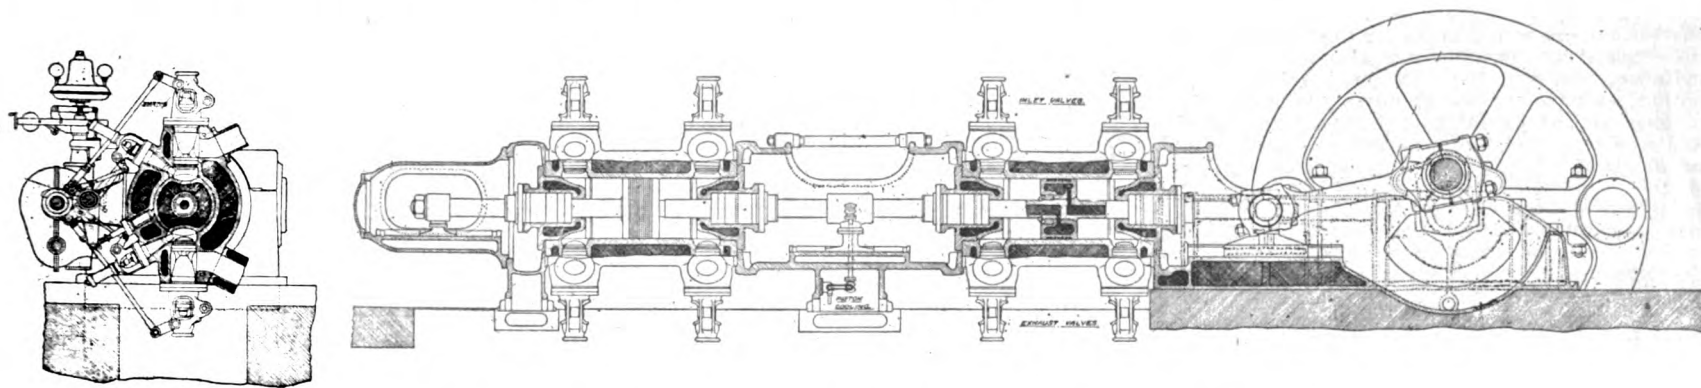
Augsburg double-acting tandem 1,600 brake h. p. horizontal Diesel engine
